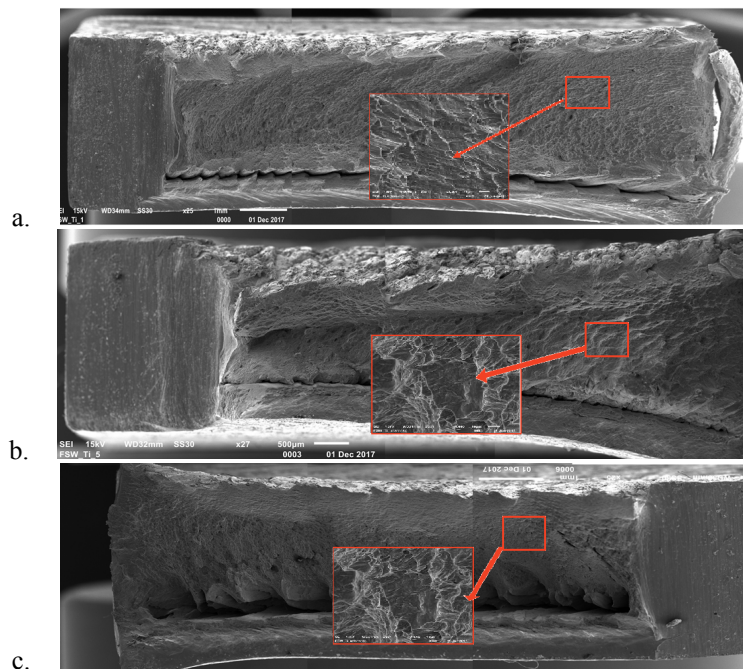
Examples of fracture surfaces joints: 250 rpm/min; 100 mm/min – a; 250 rpm/min; 200 mm/min – b; 250 rpm/min; 75 mm/min – c;
